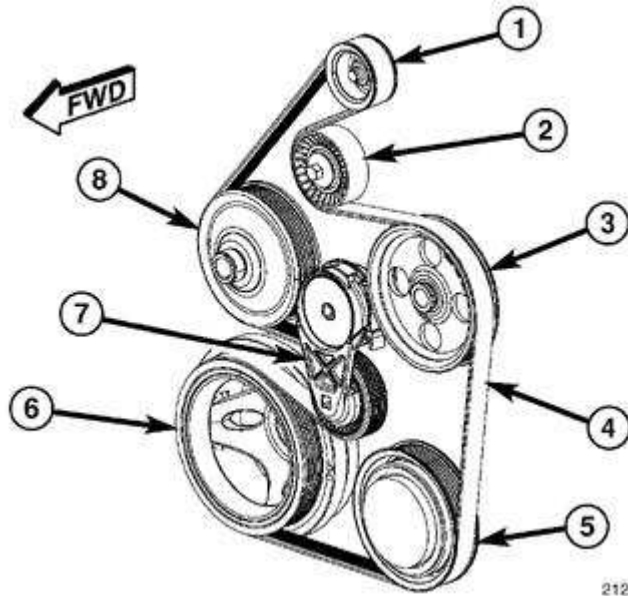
Identifying Accessory Drive Belt Routing - 5.7L
